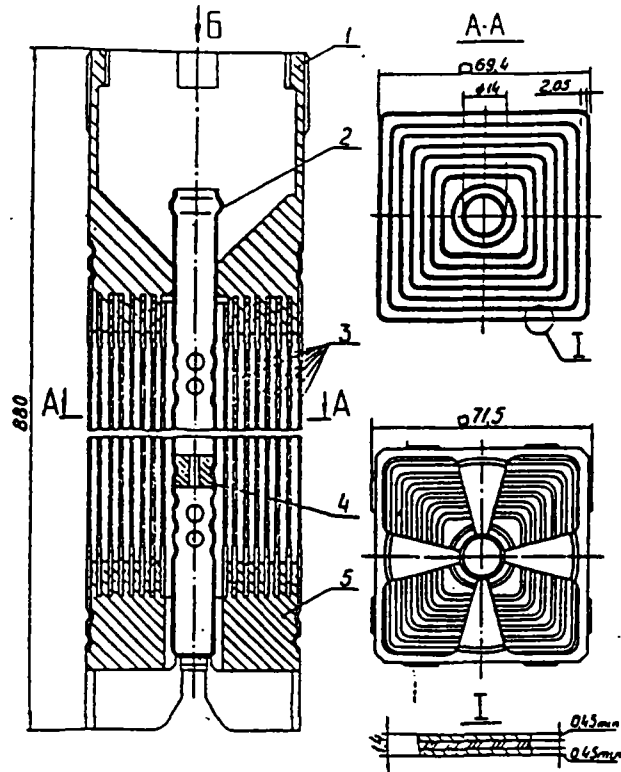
Fuel assembly of the IRT-3M type; 1 – cap; 2 – displacer; 3 – fuel elements; 4 – throttle; 5 – ending part.
